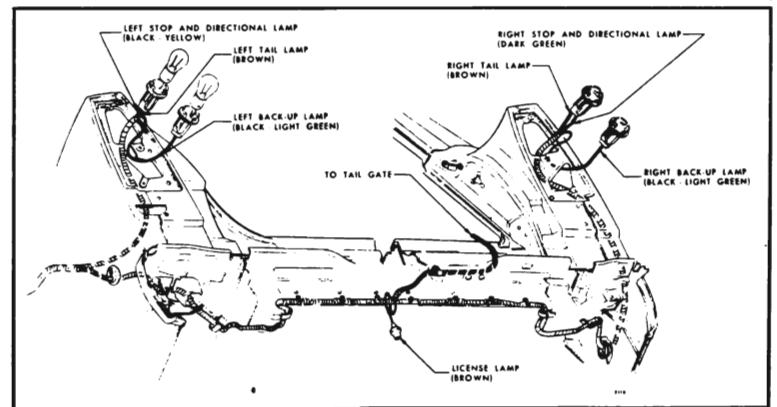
Rear Cross Bar Wiring - Chevrolet "X" Bodies
